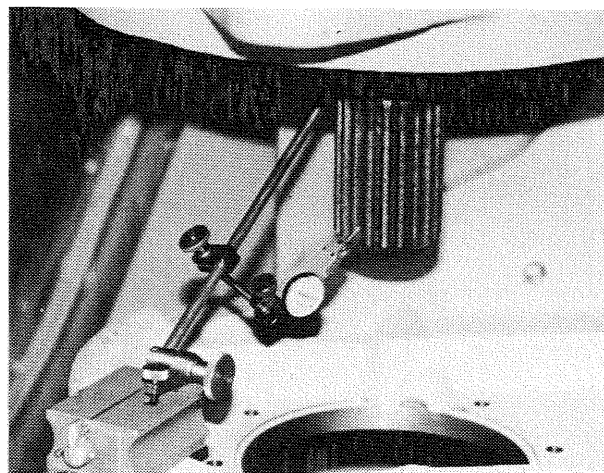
Ring Gear, Pinion & Drum Shaft (4 of 5)
